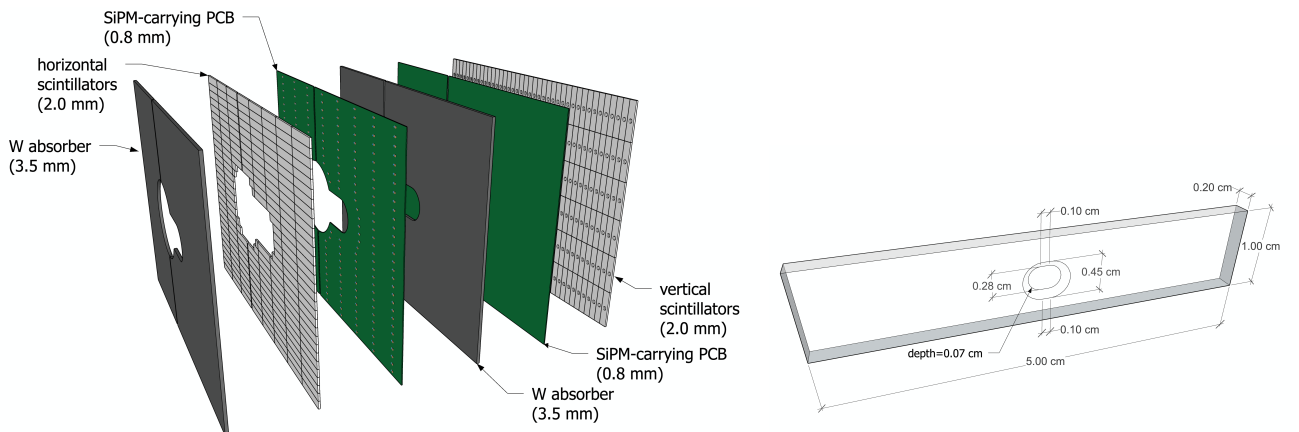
Left: exploded view of a double layer of the FDC. Right: dimensions of a single scintillator.
